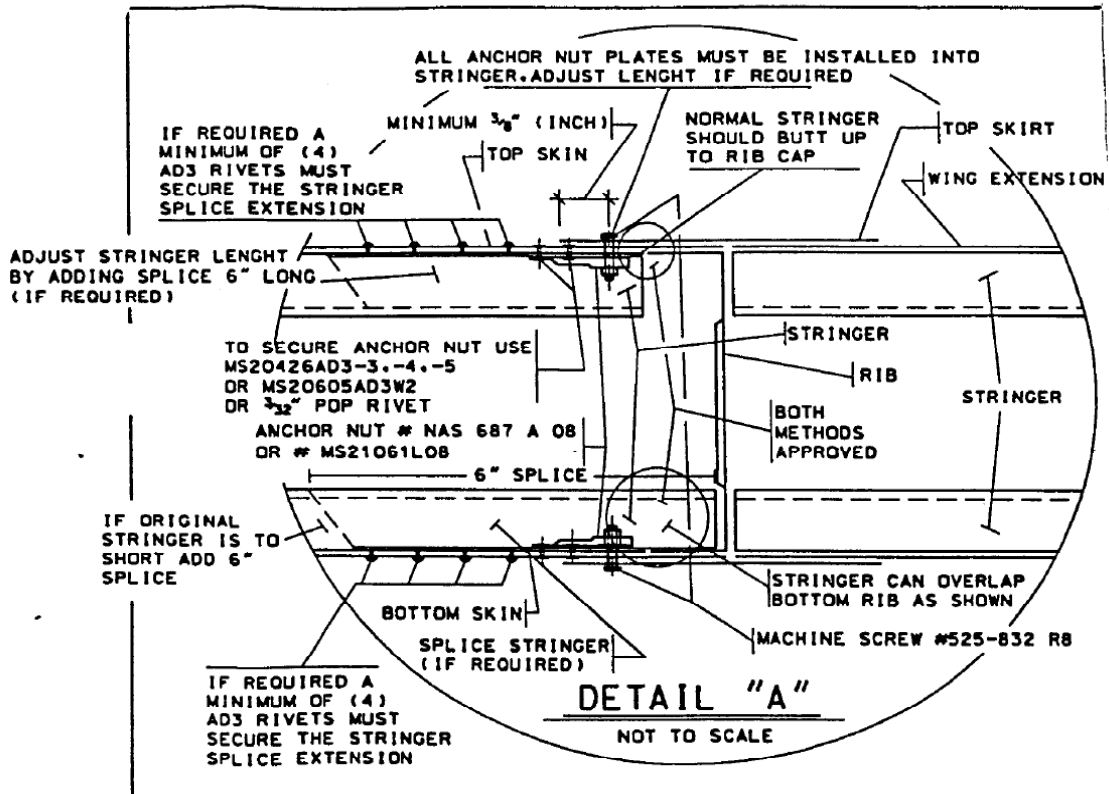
Positioning Anchor Nuts and Splicing Stringers
